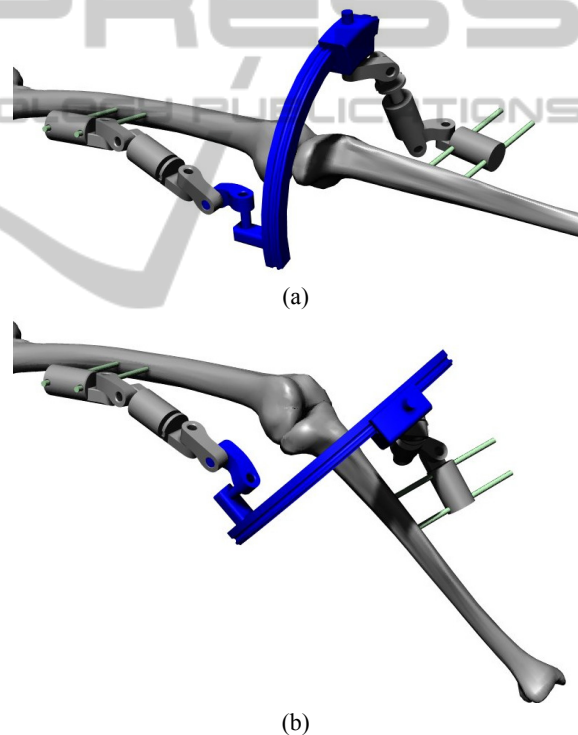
Virtual CAD model of the whole 2-DOF hinged external fixator implanted to a virtual knee model: (a) assembly in the full extended configuration with no LR rotation, and (b) assembly in a configuration such that the angle of flexion is about 45° relative to the configuration in (a), and the angle of longitudinal rotation is approximately 5° relative to the configuration in (a).
